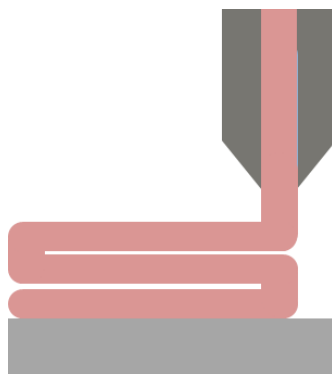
Schematic illustration the deposition of polymer via the nozzle of a material extrusion additive manufacture machine.
